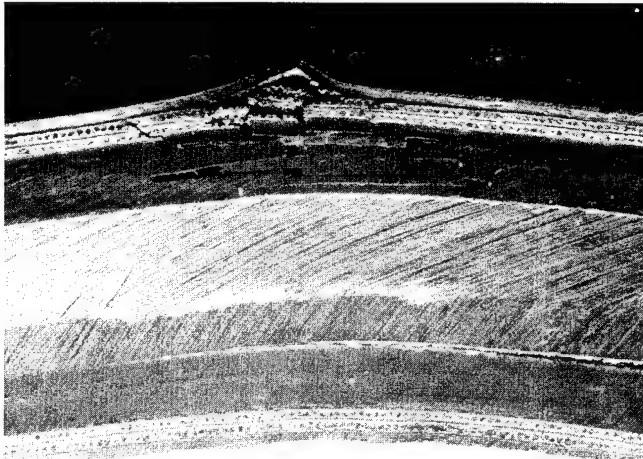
Short Beam Shear Specimens (Superhybrid Blade RL002).
